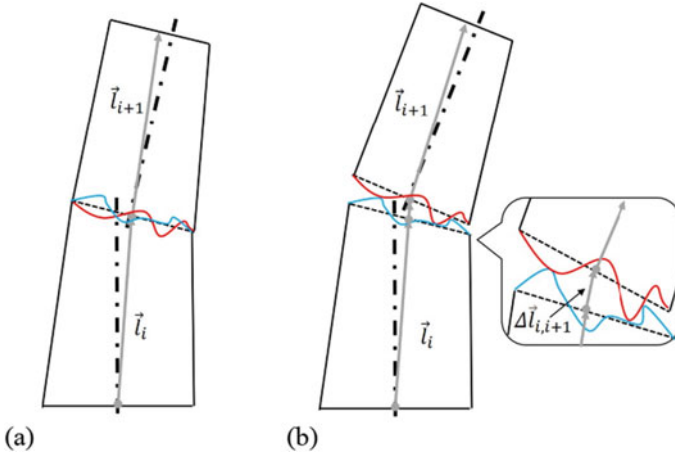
Different between assembly analysis methods. a Ideal surface assembly. b Featured surface assembly
